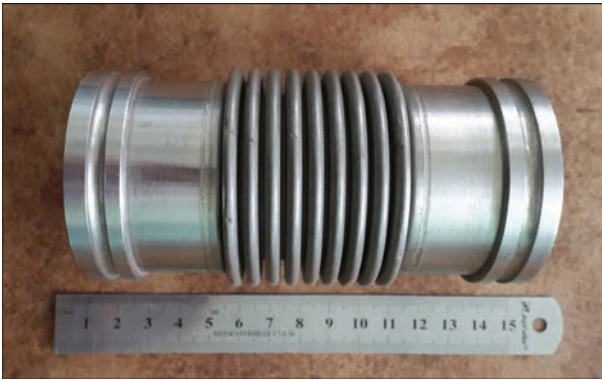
Multilayer bellow, made of tubes, welded by laser radiator
